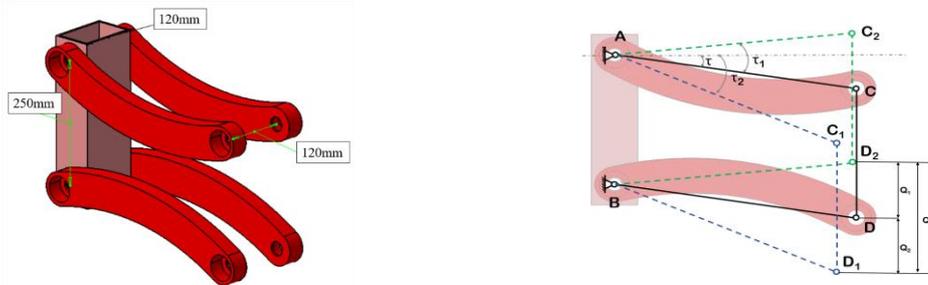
Schematic Diagram and Dimensional Drawing of the Profiling Rod
